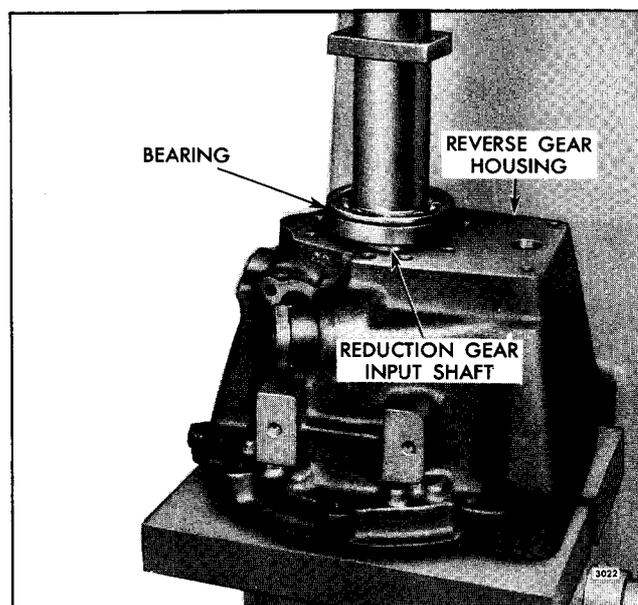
Installing Reduction Gear Input Shaft Bearing on Input Shaft and in Gear Housing (2.5:1 and 3:1 Ratios)
